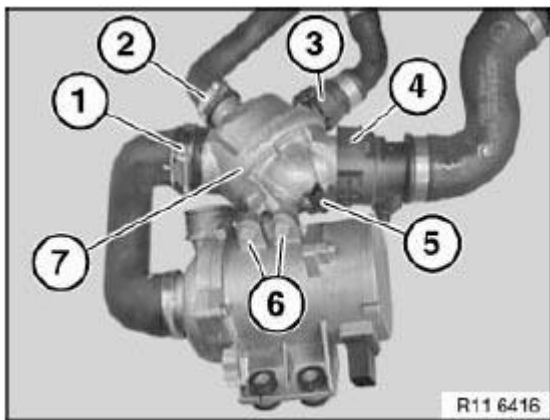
Identifying Coolant Hose, Plug Connection And Coolant Thermostat
